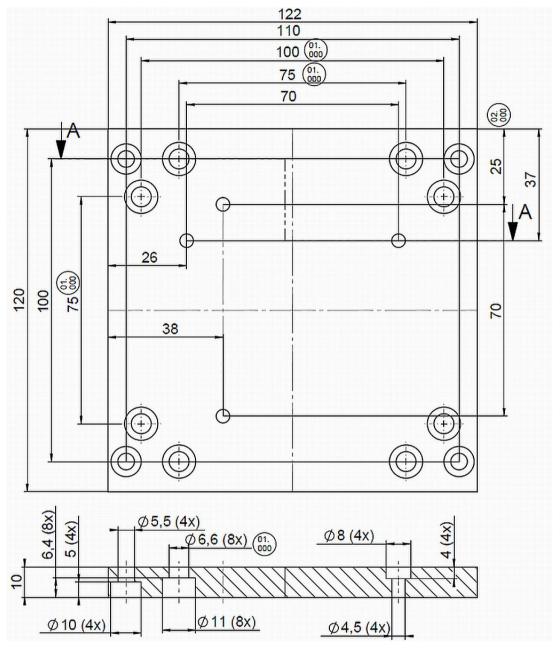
Dimensions of the M-413.AP2 mounting adapter
